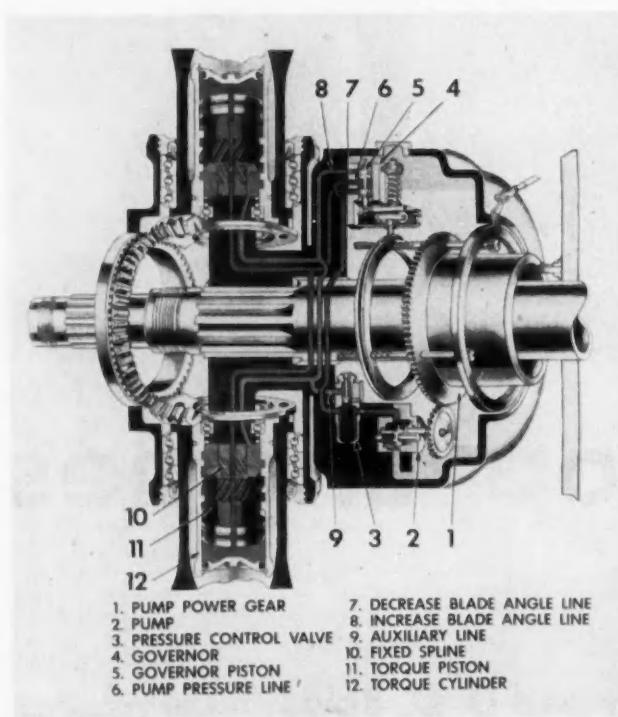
Schematic cutaway of inboard components of dual rotation propeller
